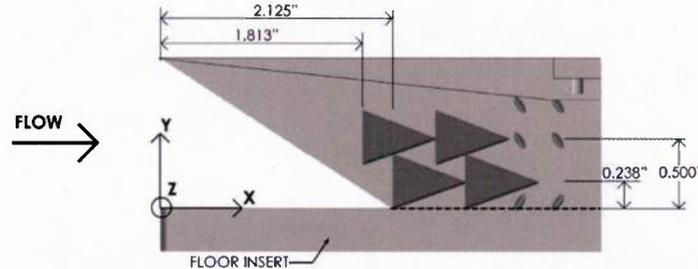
Dimensions of the vortex generator used to form Wheeler Doublets.
